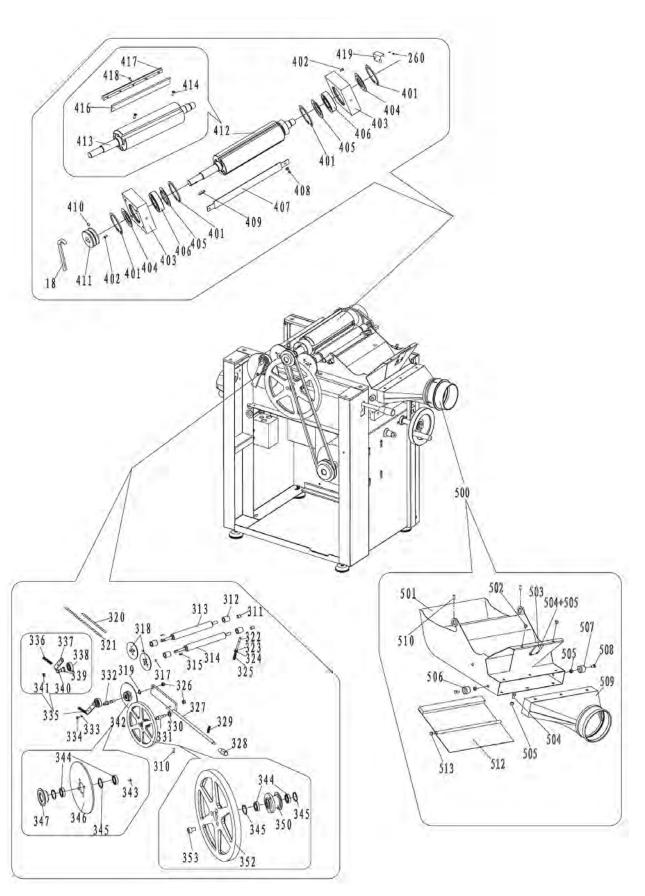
Spare parts drawing 3 ADH 31-4 C and 41-4 C  $\,$
